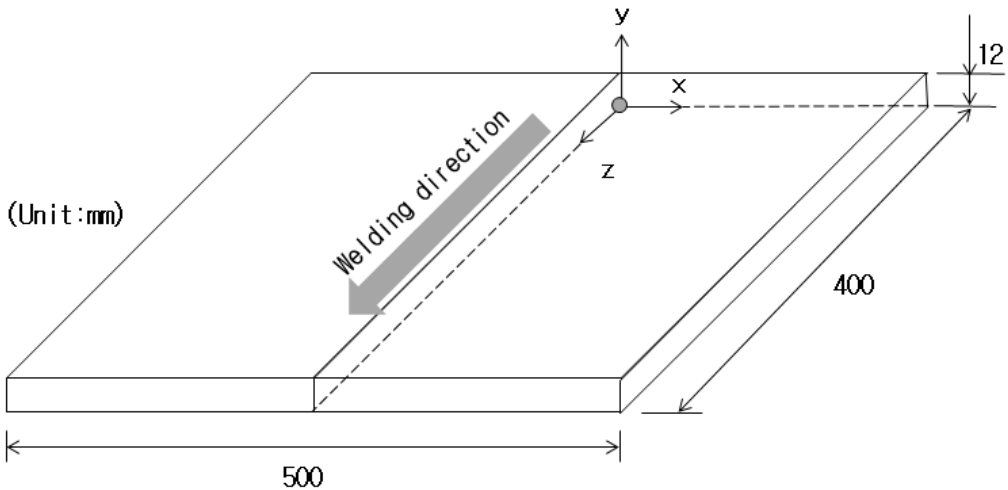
Configuration of reference model of bead-on-plate welding
